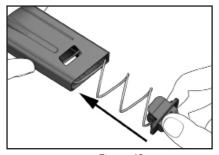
Insert the follower, spring, and locking insert Push the locking insert above the cutouts
